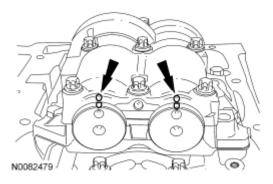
Locating Balancer Unit And Shafts Reference Mark
